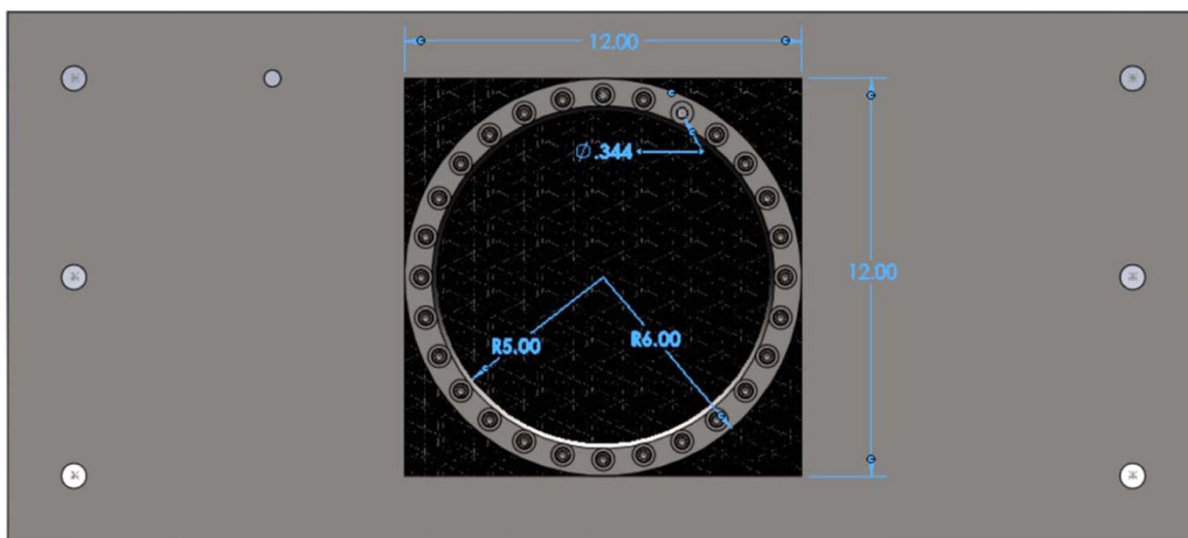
Impact test fixture for 12 in. square specimens. Dimensions are in inches.
